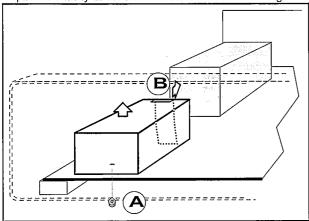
A clip and a screw hold the oven oscillators in place.
